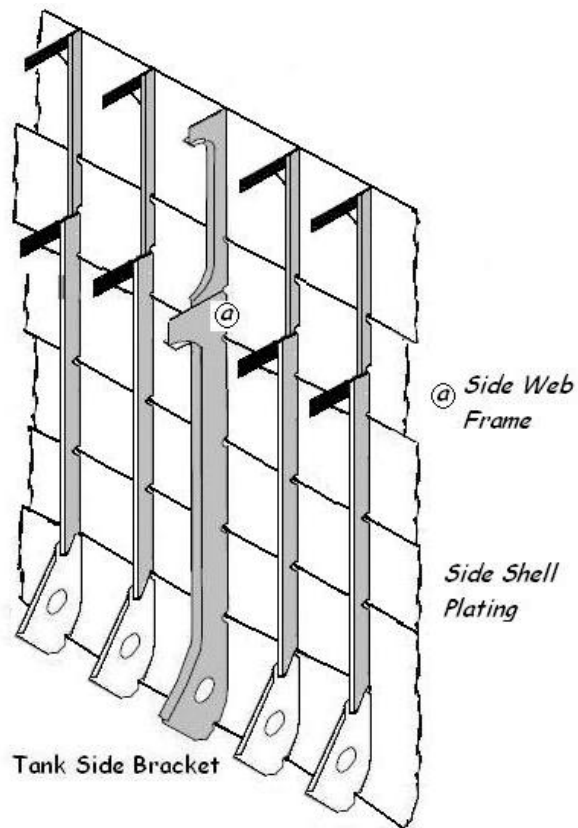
Transverse Framing ship Side Constructions (AMSP, 2006)
